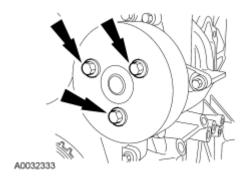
Locating Coolant Pump Pulley Bolts Courtesy of FORD MOTOR CO.
